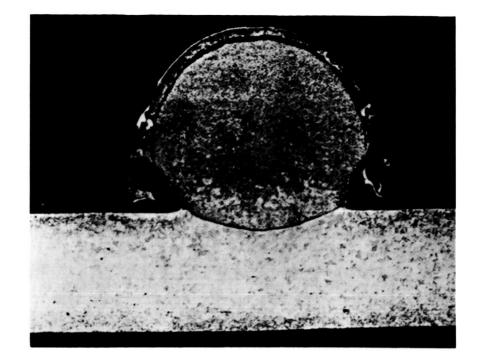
Weld joint 1.4.84; gold plated Dumet wire to Inco ribbon; not sterilized; 150x magnification; Carapella etch (02328).
